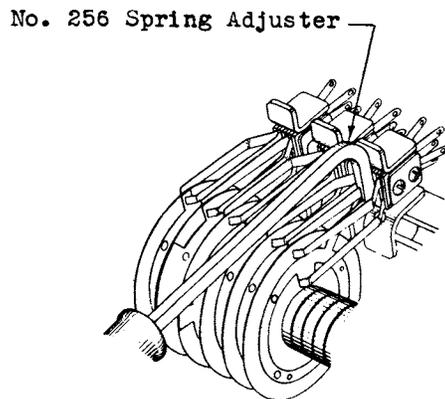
Method of Using the No. 256 Spring Adjuster in Adjusting Outer Contact Springs
